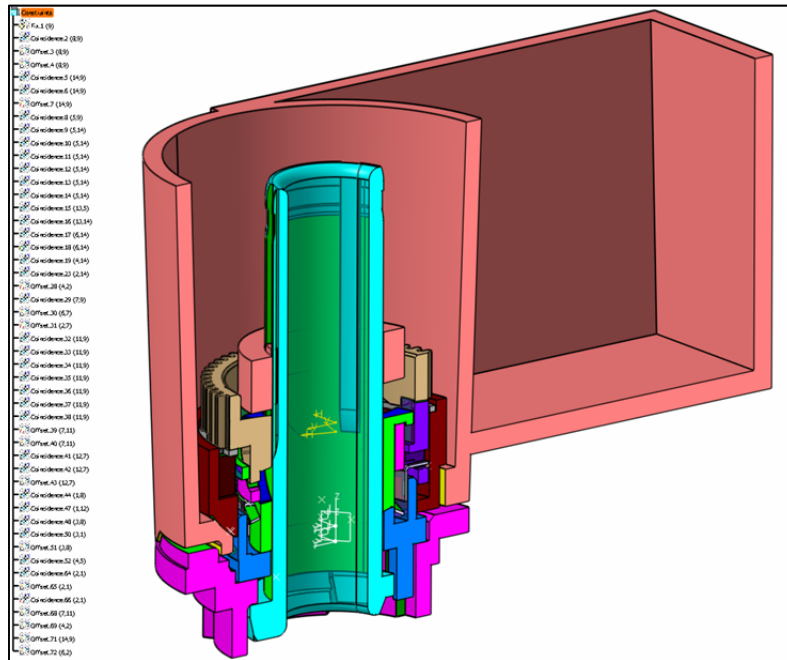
Parametric CAD assembly model of concept actuator design
